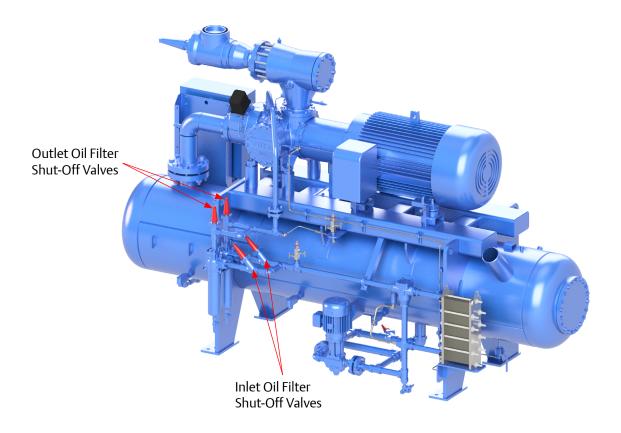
Dual Oil Filter Setup for Oil Filters with Manifold Heads
